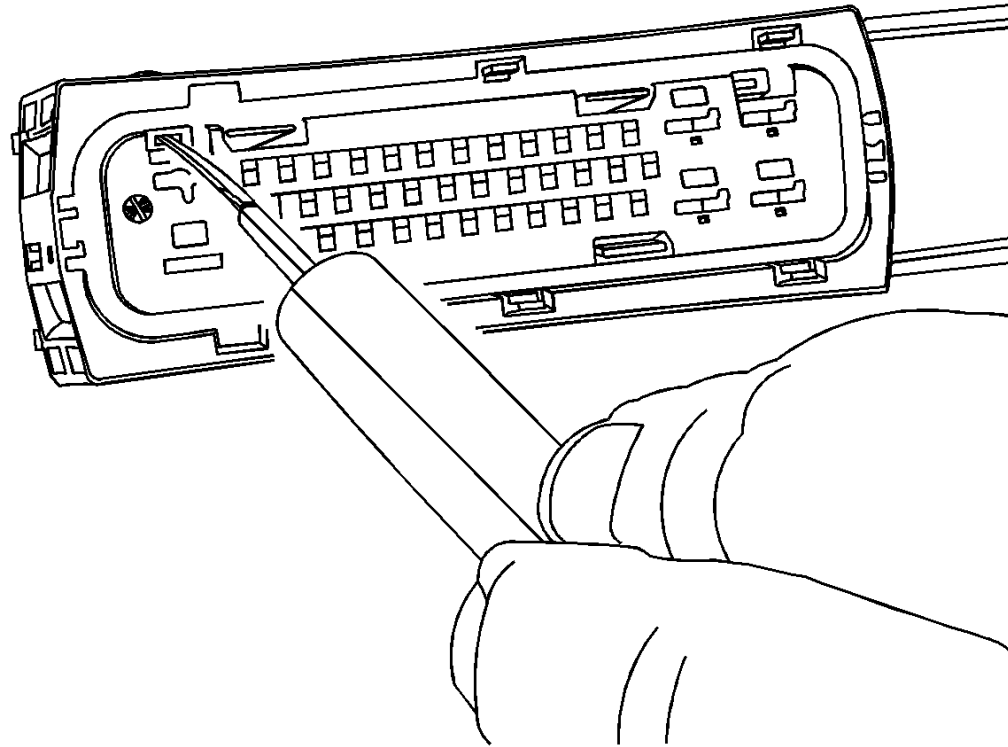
View Of Inserting Tool Into Terminal Release Cavity
